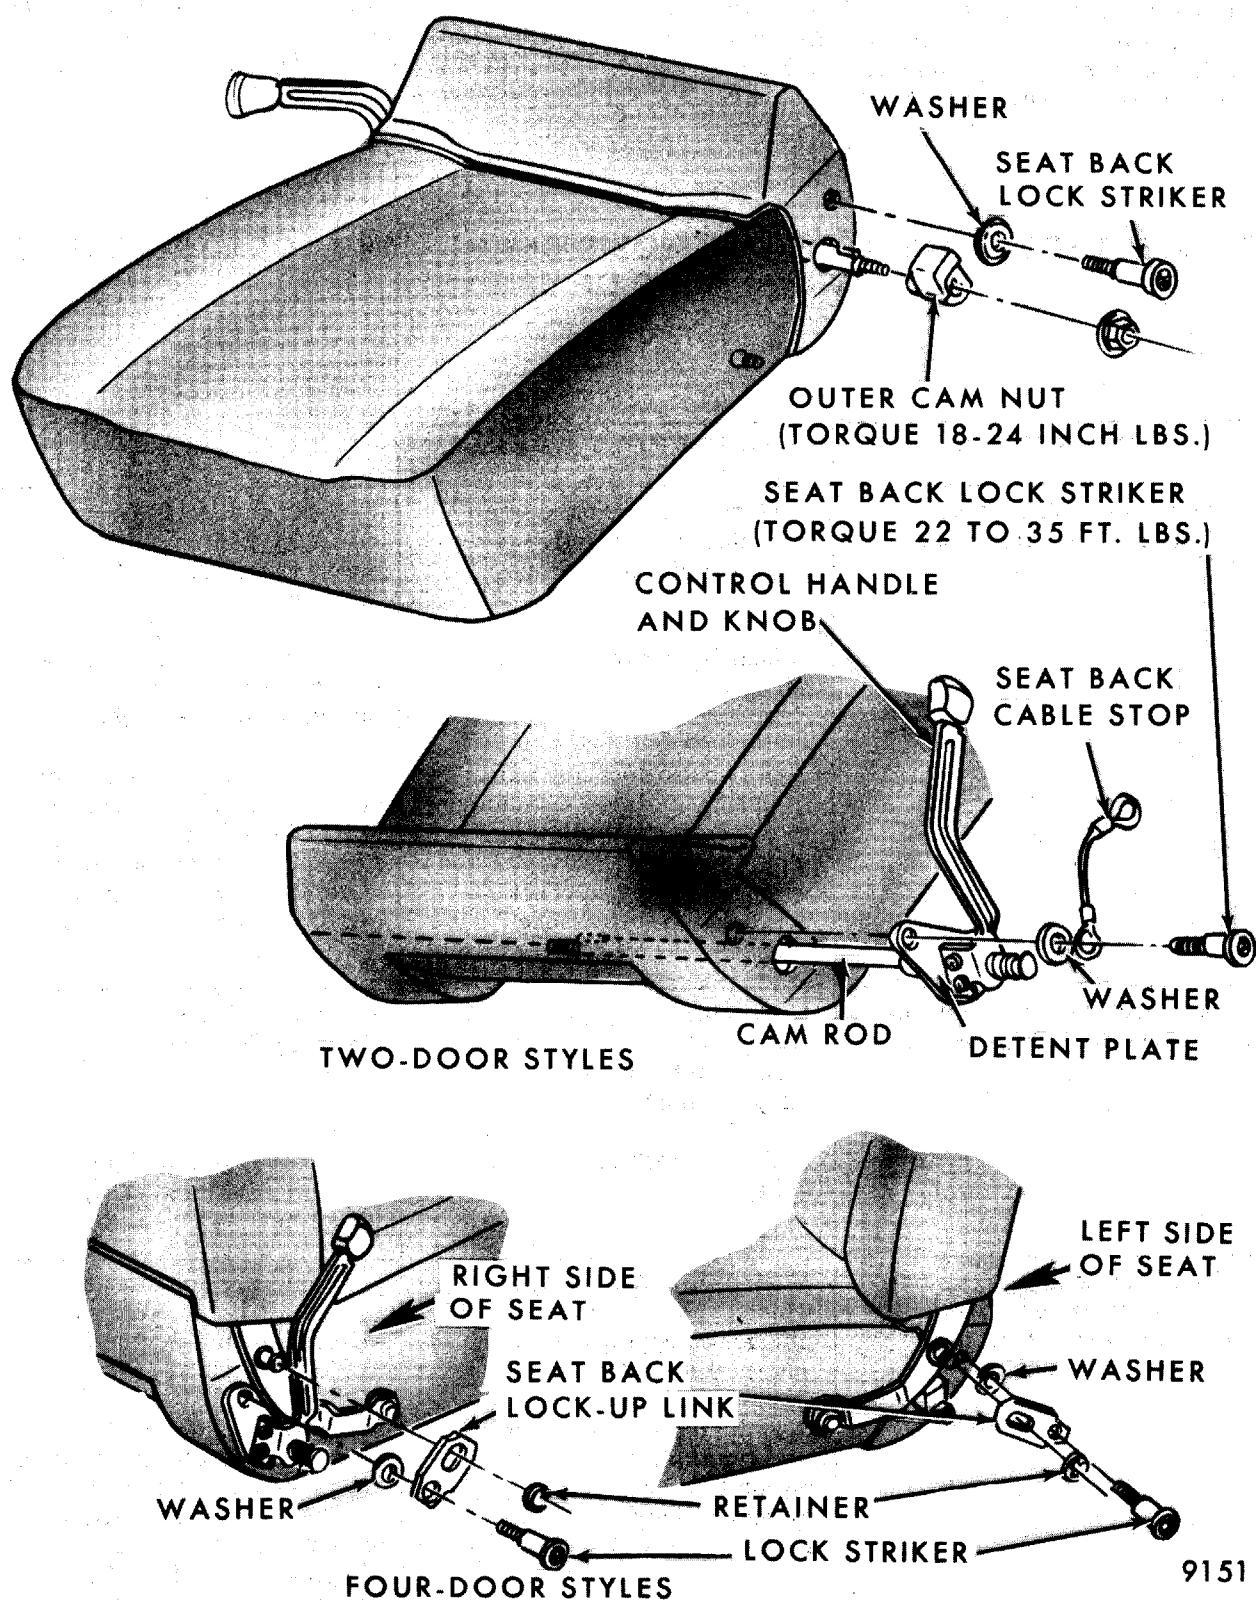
Adjustable Front Seat Back Assembly (Driver's Side Only) - Chevrolet "X" Coupes and Sedans
